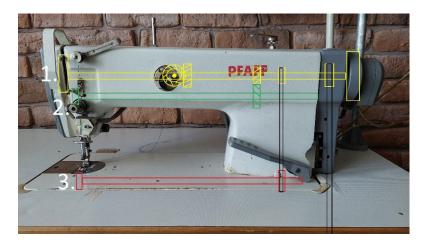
Transmission Tunnel and Shuttle Bobbin Filler
